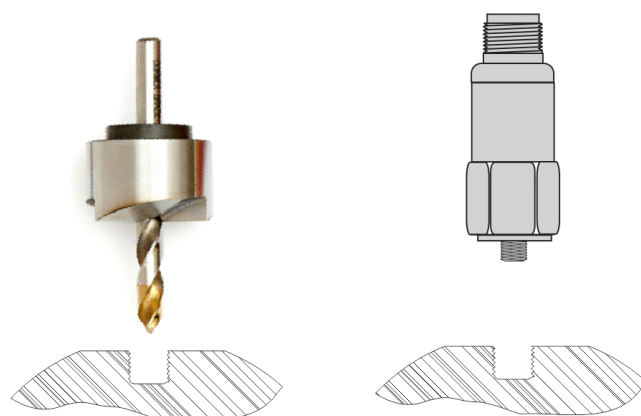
One of the best ways to mount an accelerometer is to counterbore a flat surface on the bearing cap of the machine you wish to monitor. However finding suitable 'real estate' on smaller machines can sometimes present a challenge.
